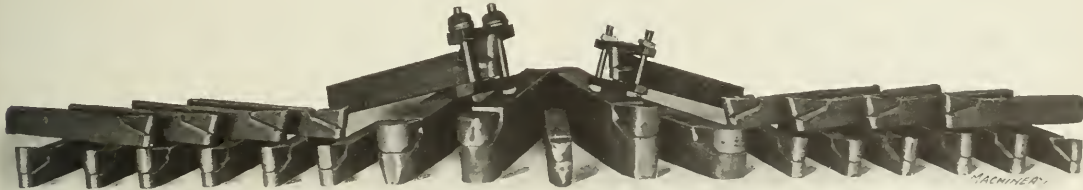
Cutting Tools prepared for welding Points onto Shanks
